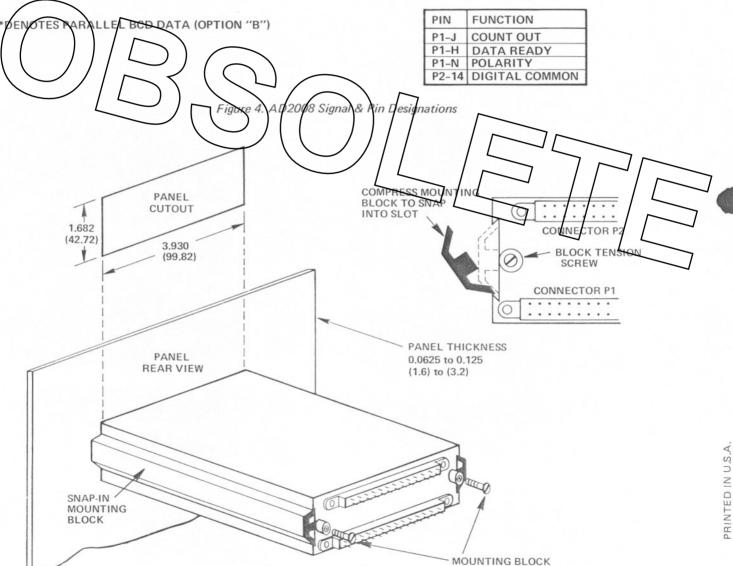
AD2008 Mechanical Outline (Dimensions shown in inches and (mm))
